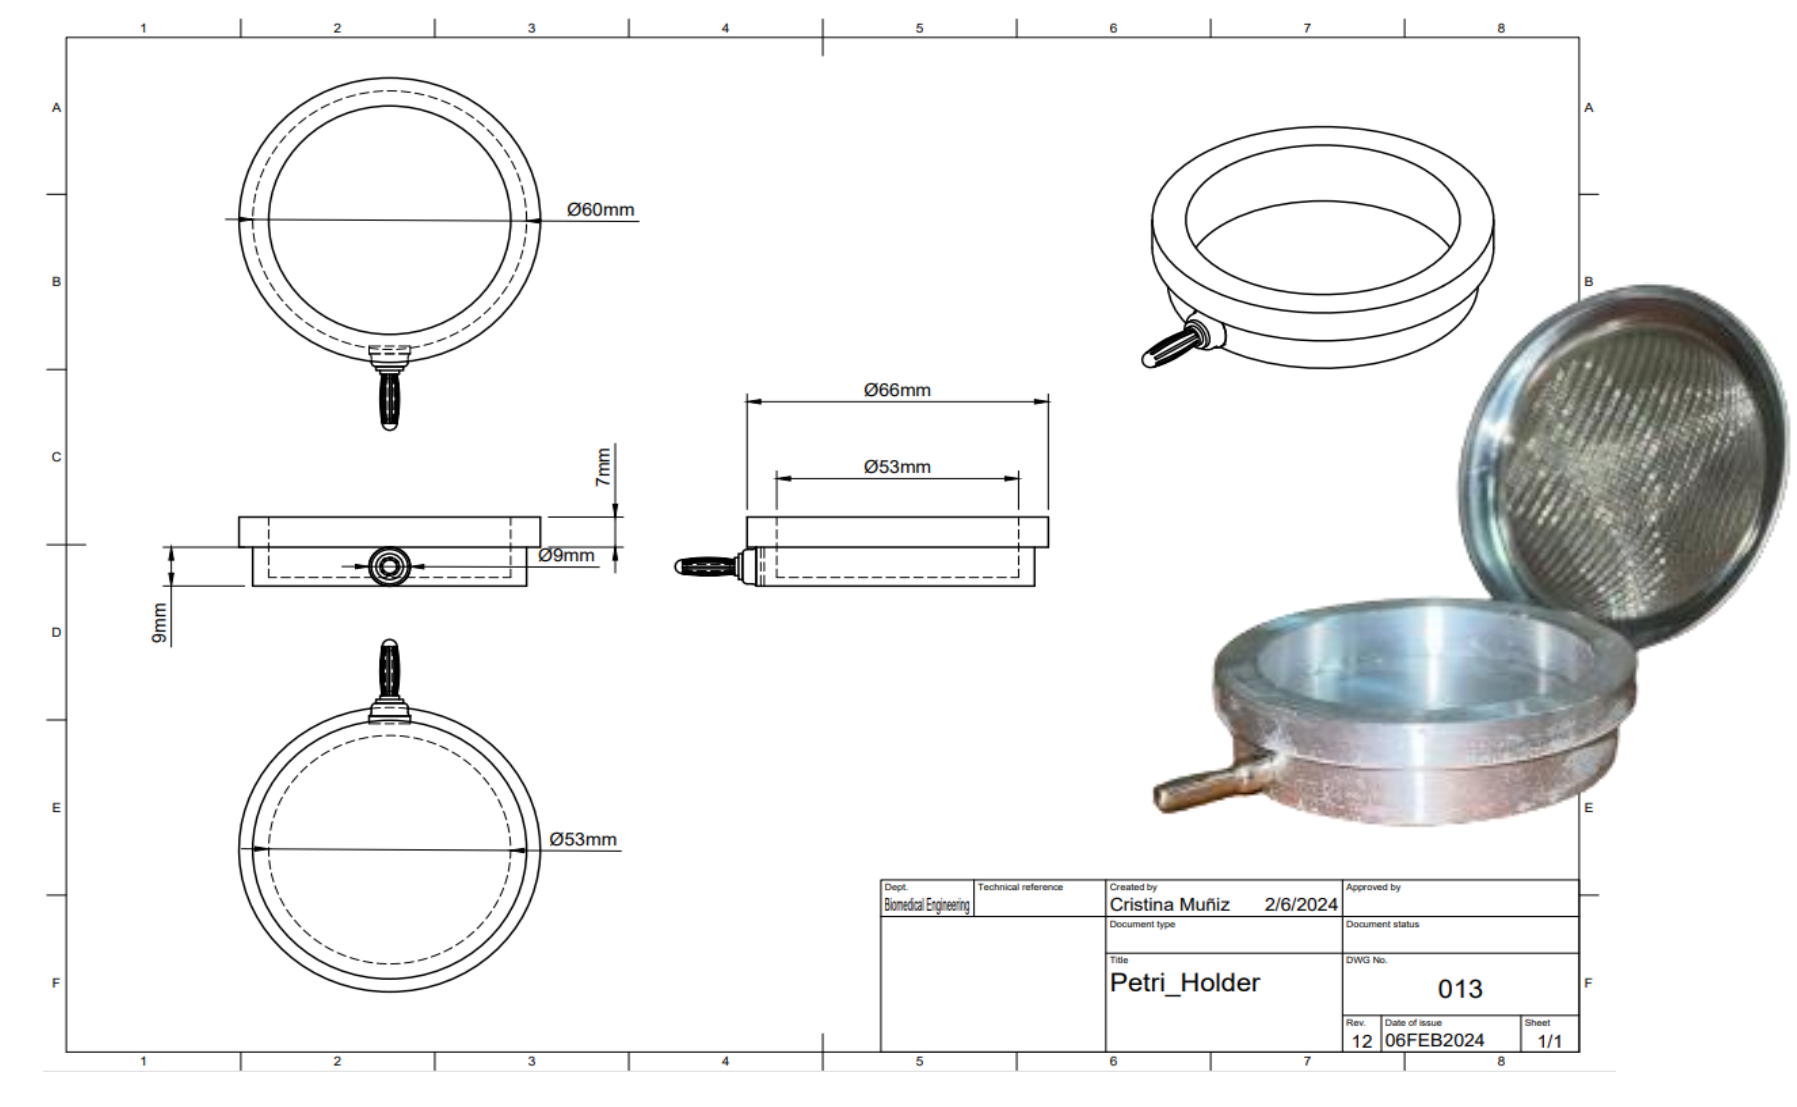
Electrode ('Petri\_Holder') Design Drawing and Manufactured Result
